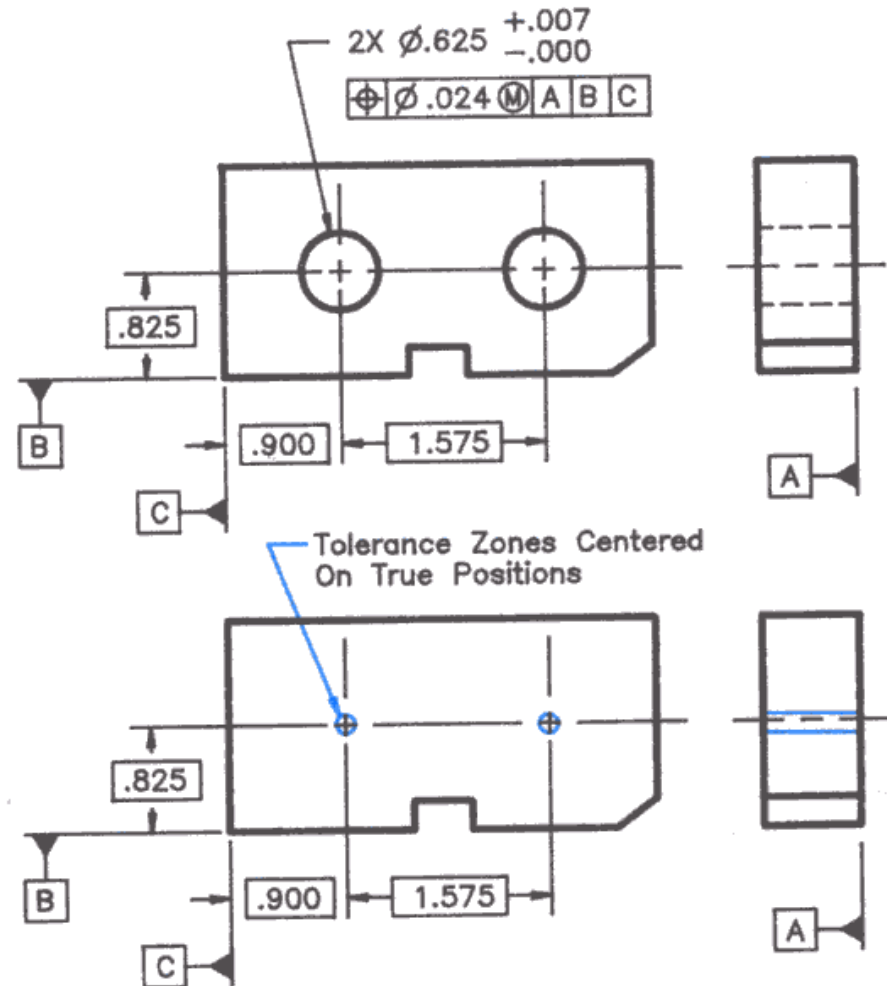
Tolerance zones for holes are centered on the theoretically true positions for the holes.
